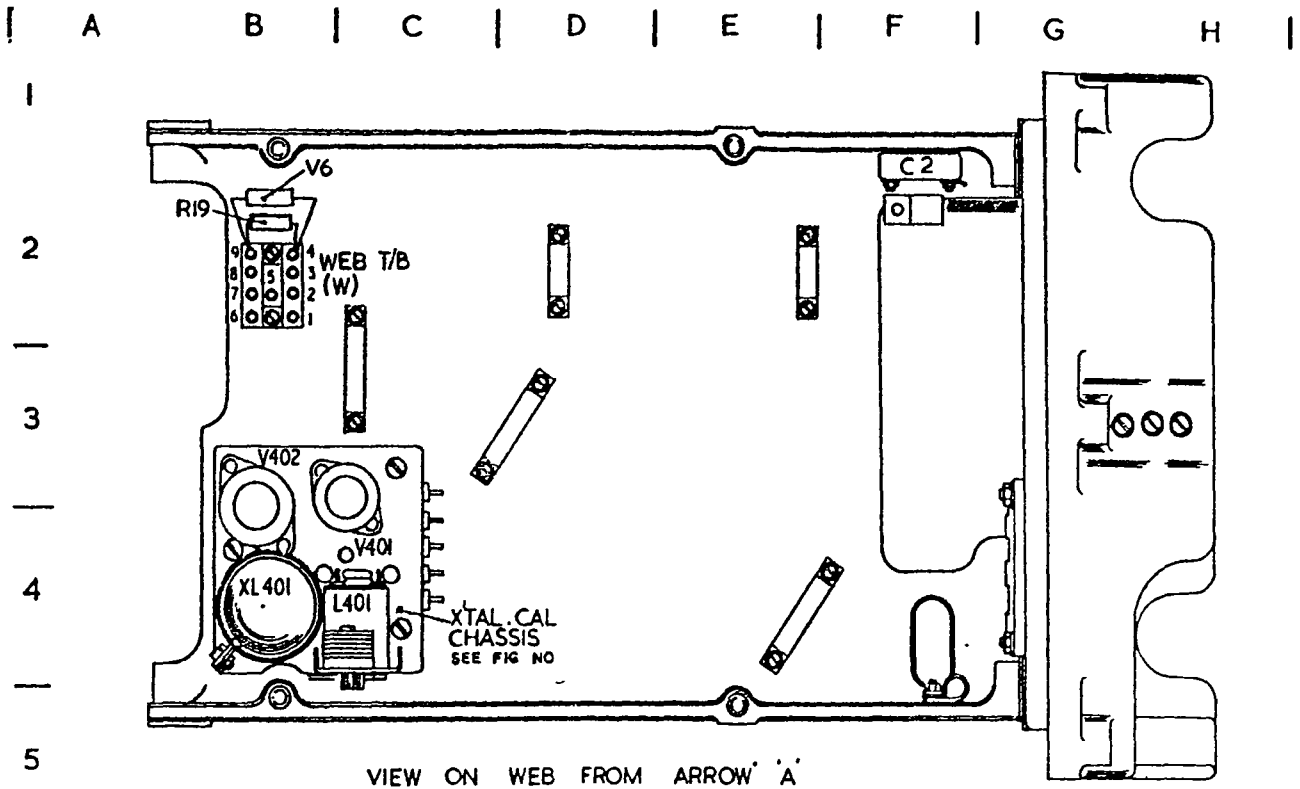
Front panel - solder wiring (SAY 22, 23)
